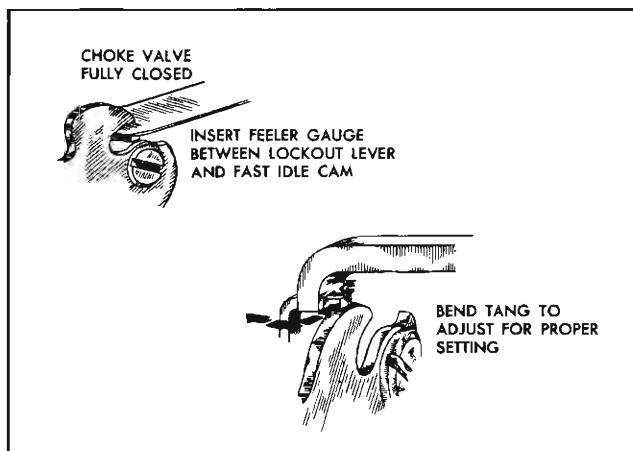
B-59 Secondary Throttle Lockout Adjustment
